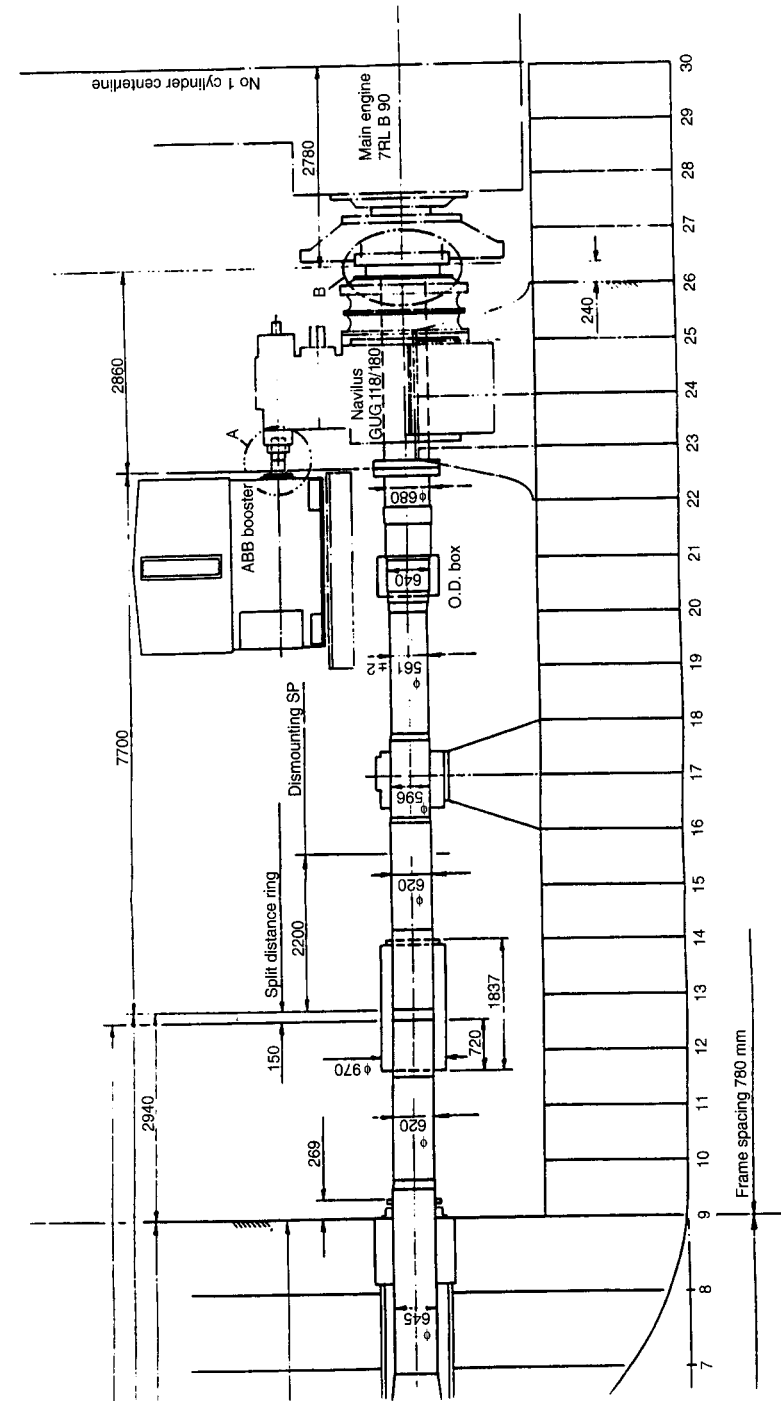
Shaft arrangement for booster motor and tunnel gear. Courtesy Blohm+Voss AG.
